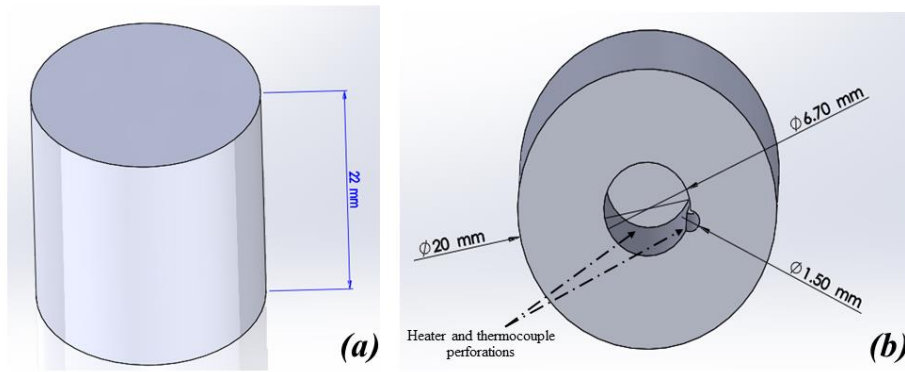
The aluminium; (a) Top view and (b) Bottom view.
